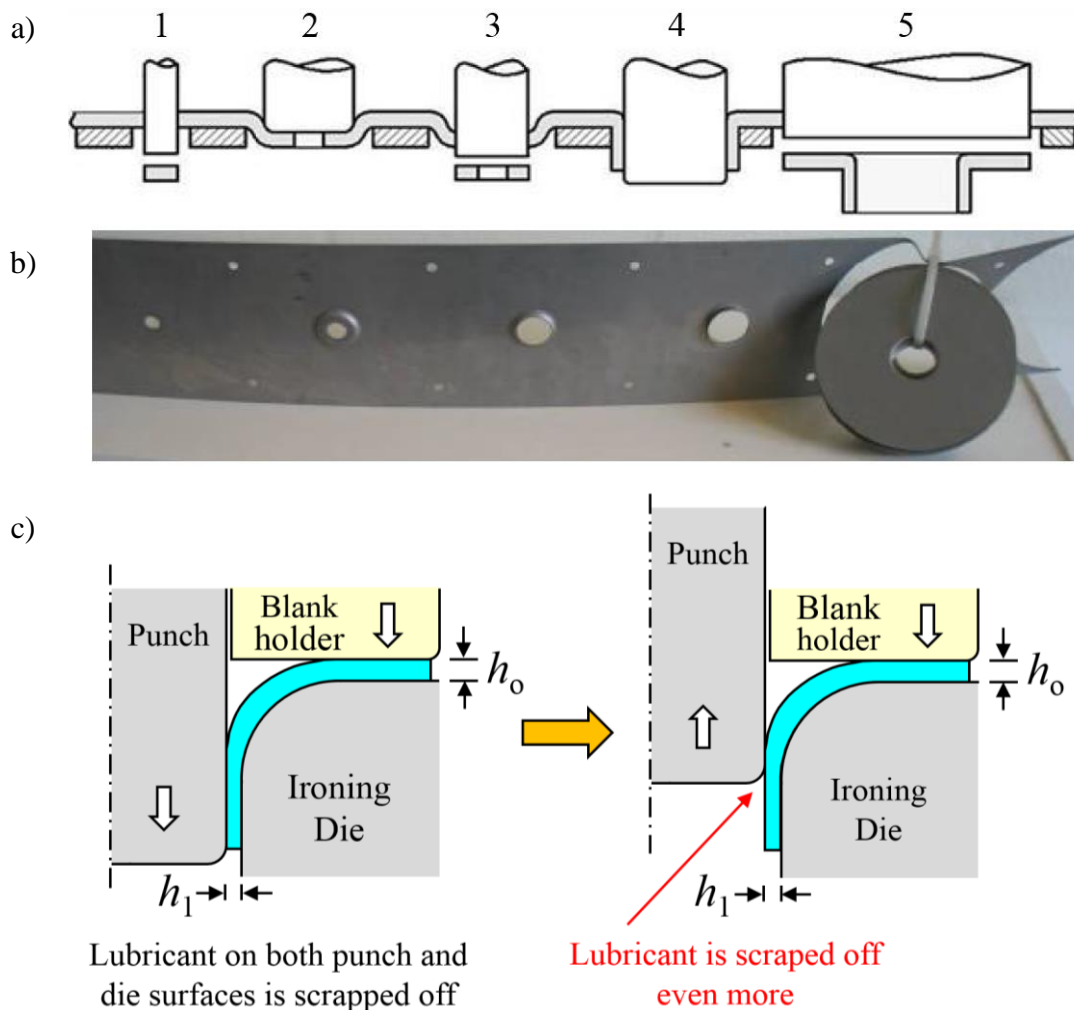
Production test in a progressive tool. a) Schematic outline of a five-step operation, b) deformed strip, and c) outline of collar drawing and ironing operation [39].
